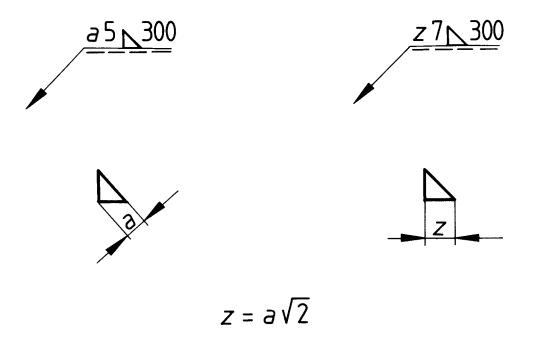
Methods of indicating dimensions for fillet welds
